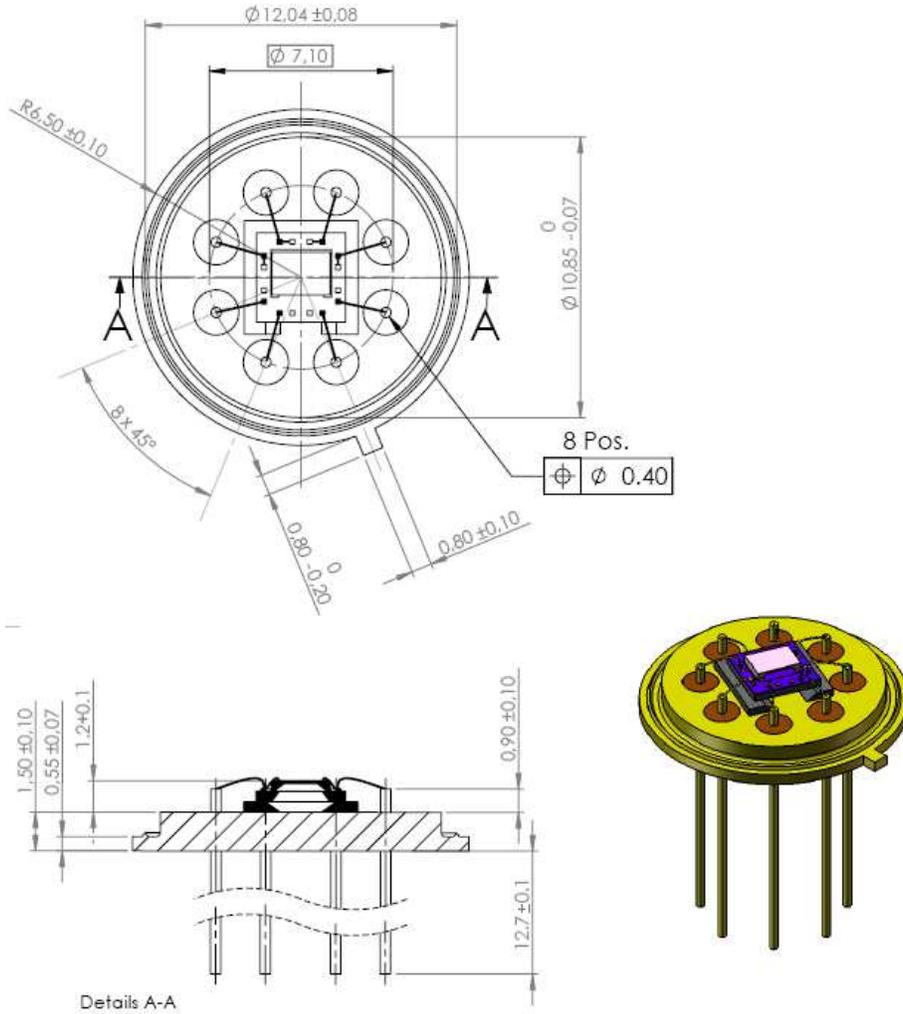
Mechanical dimensions of sensor – all dimensions in mm
